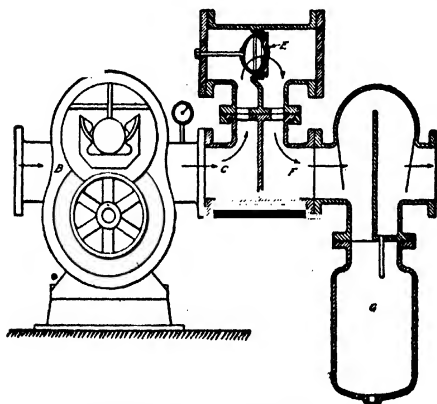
Section of Smith Tar Extractor and Gas Cleaner
